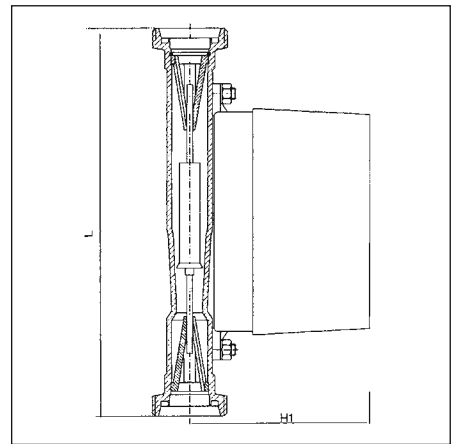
measuring tube with hygienic connection acc. to DIN 11851
